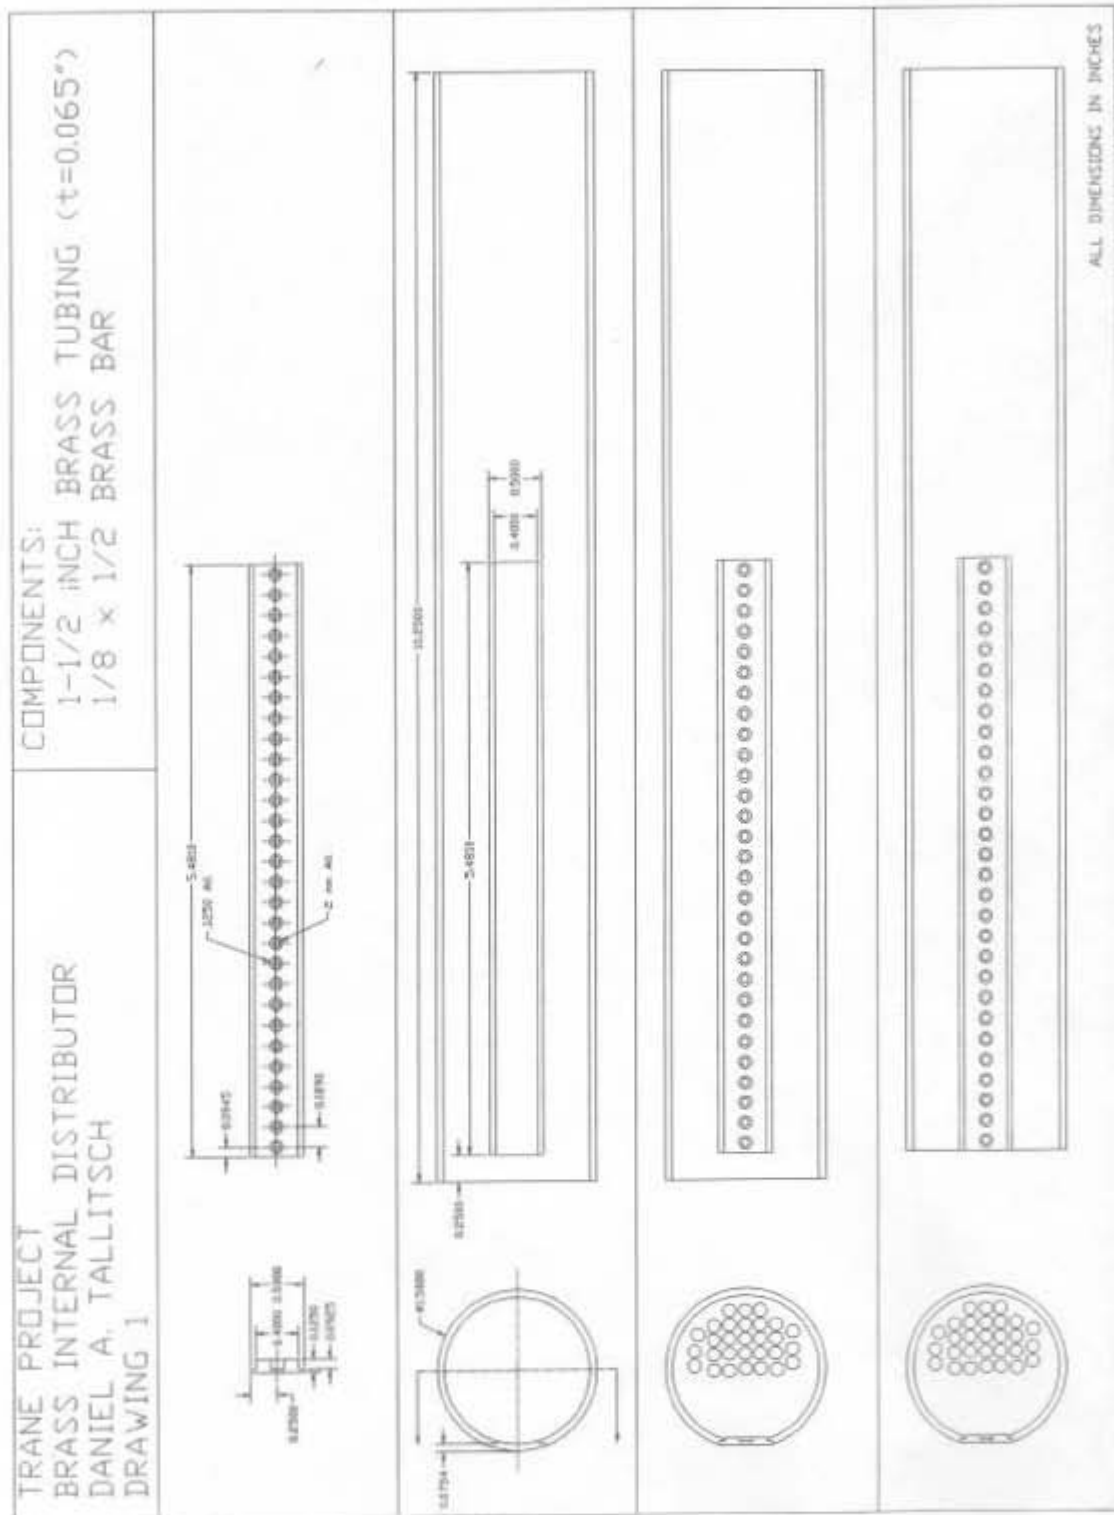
Detailed drawing of custom distributor header and orifice plate.
